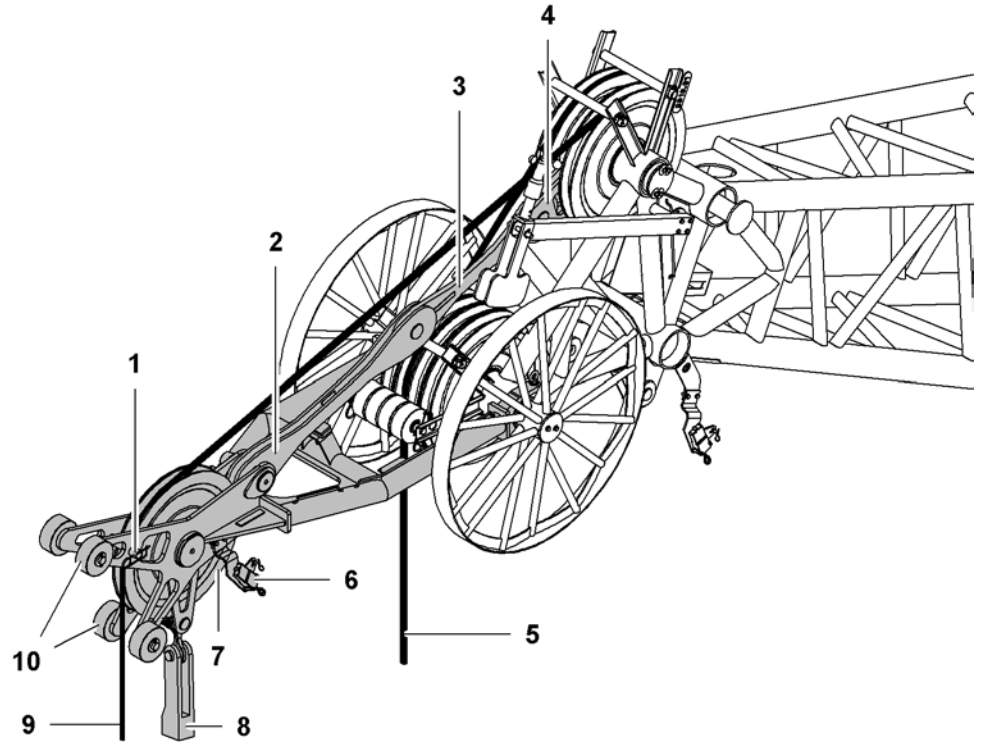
Auxiliary jib (66,000 lb) for luffing jib head 2316
